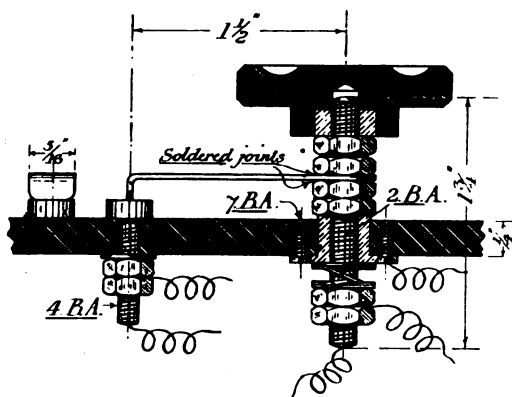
Illustrating the correct method of assembly of a switch, together with suitable dimensions.
